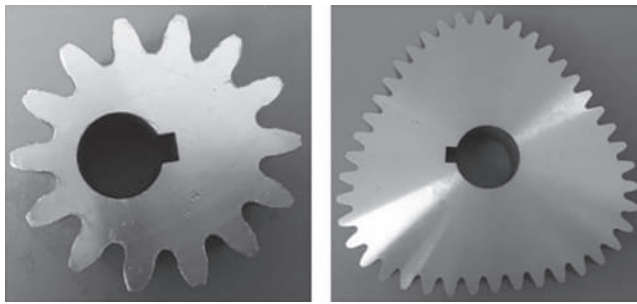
Shaping a non-circular gear by the gear shaper.
